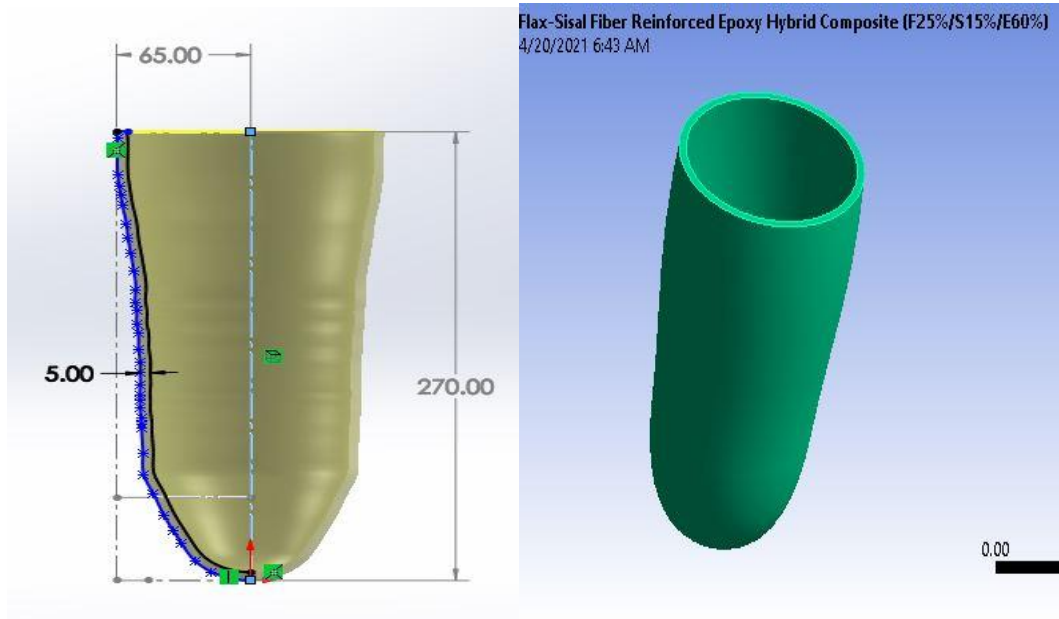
63 Overall geometry and 3D model of Prosthetic Socket
